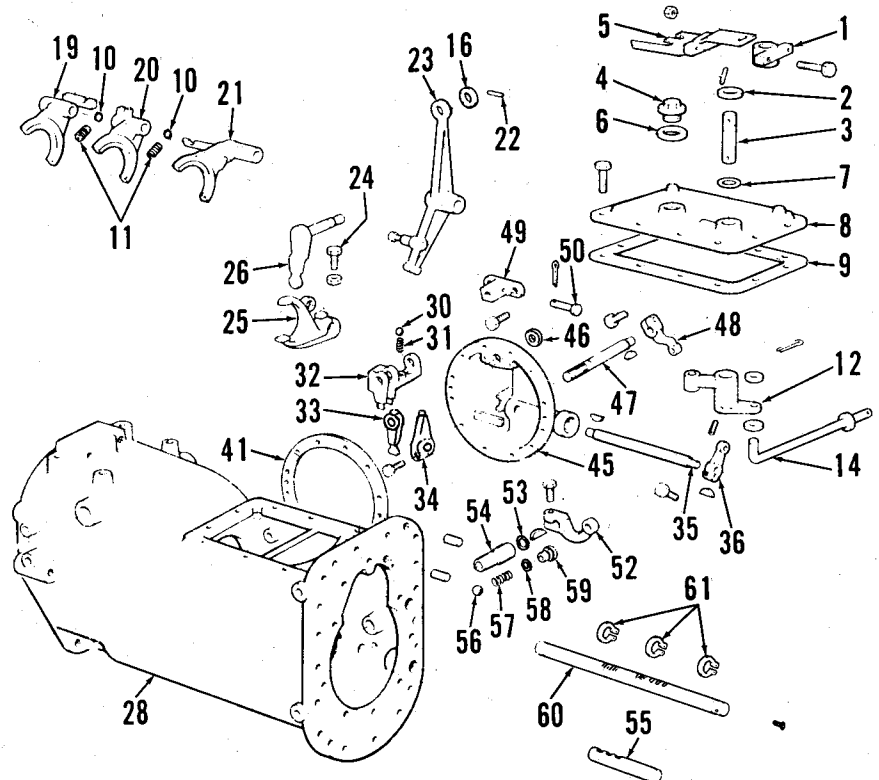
View showing transmission housing, gearshift and parking brake components.
